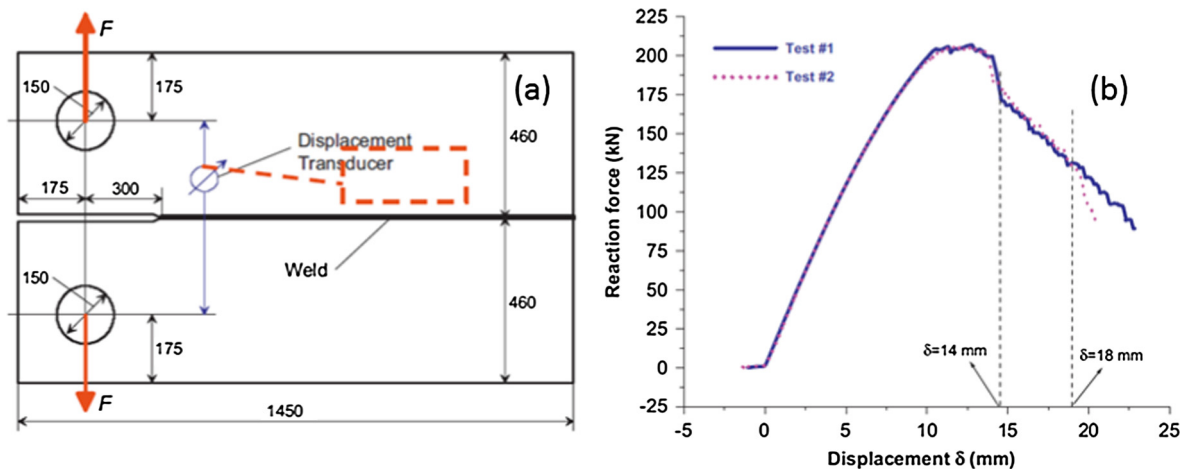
(a) Schematic of test setup and (b) Force-displacement results for Mode I fracture test of a welded aluminum extrusion (reproduced from Zheng et al. [50]).
